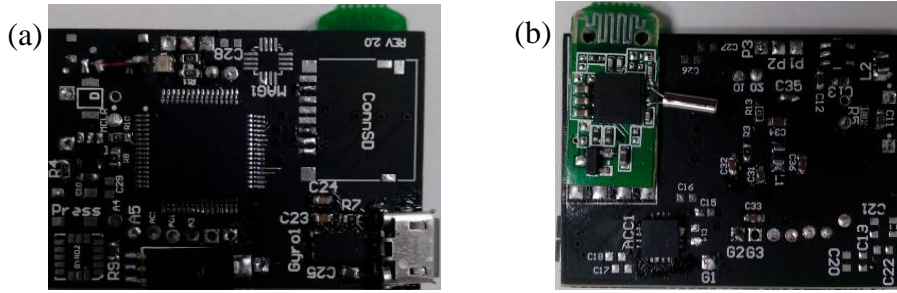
(a) The top side of the electronic board. (b) The bottom side of the electronic board.
